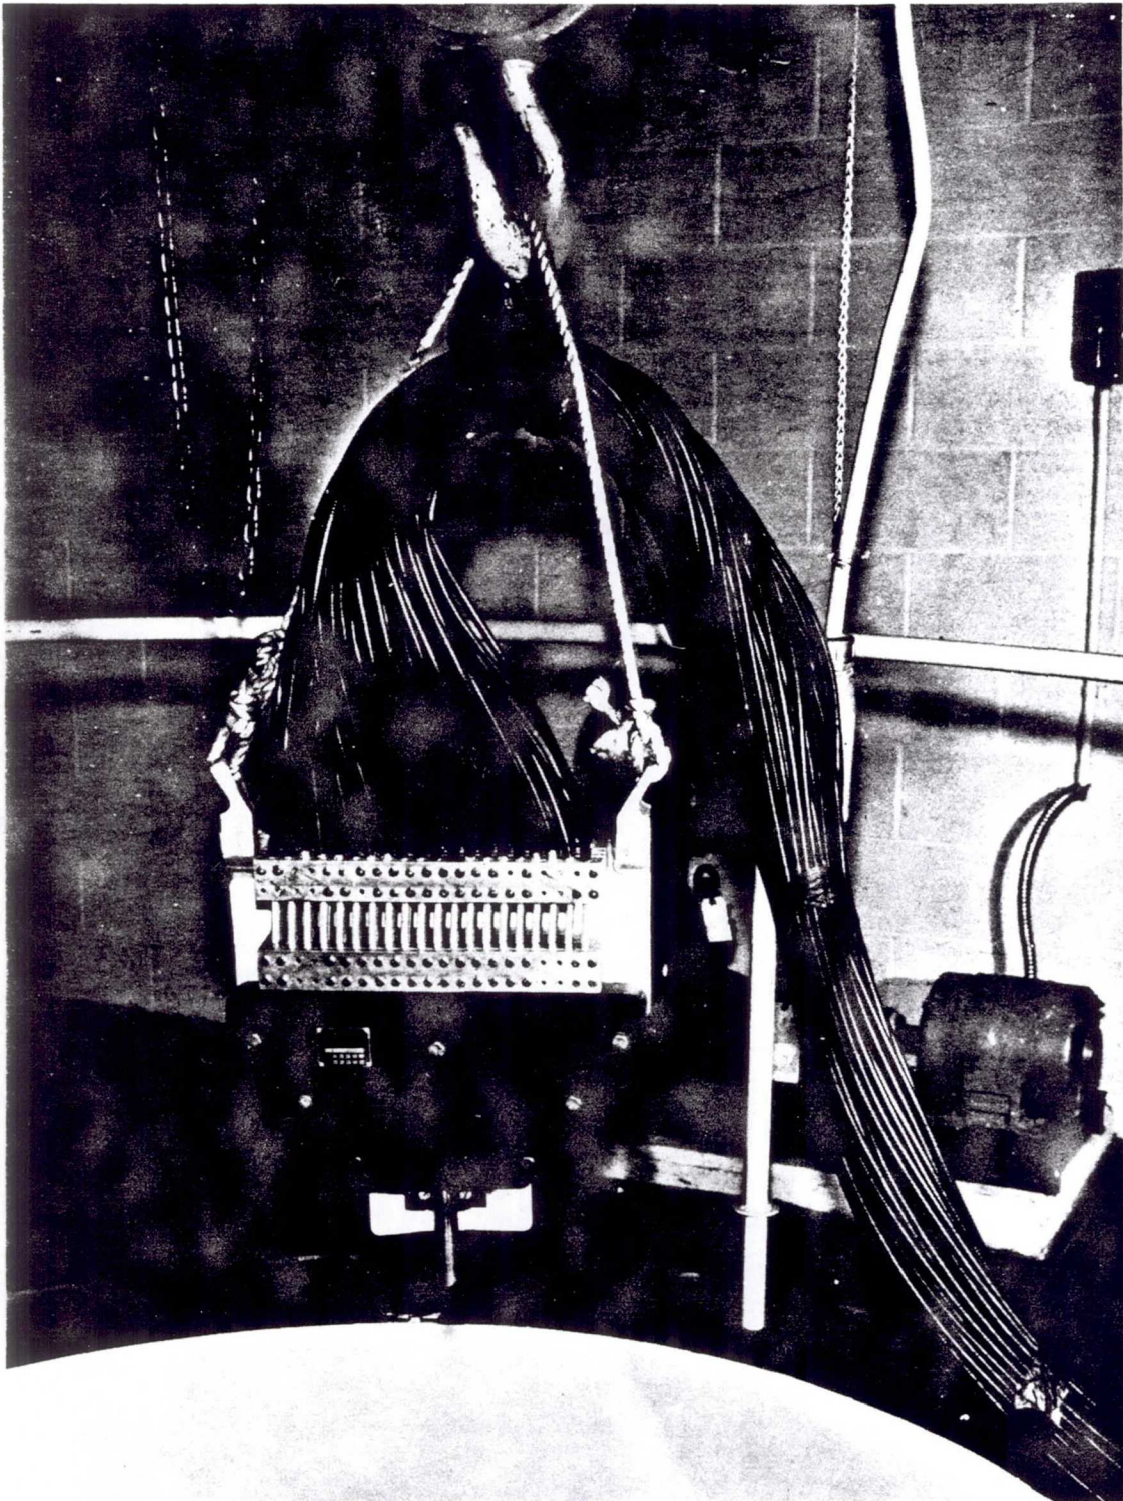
Electric discharge head for use in exploding bridewire tests.
